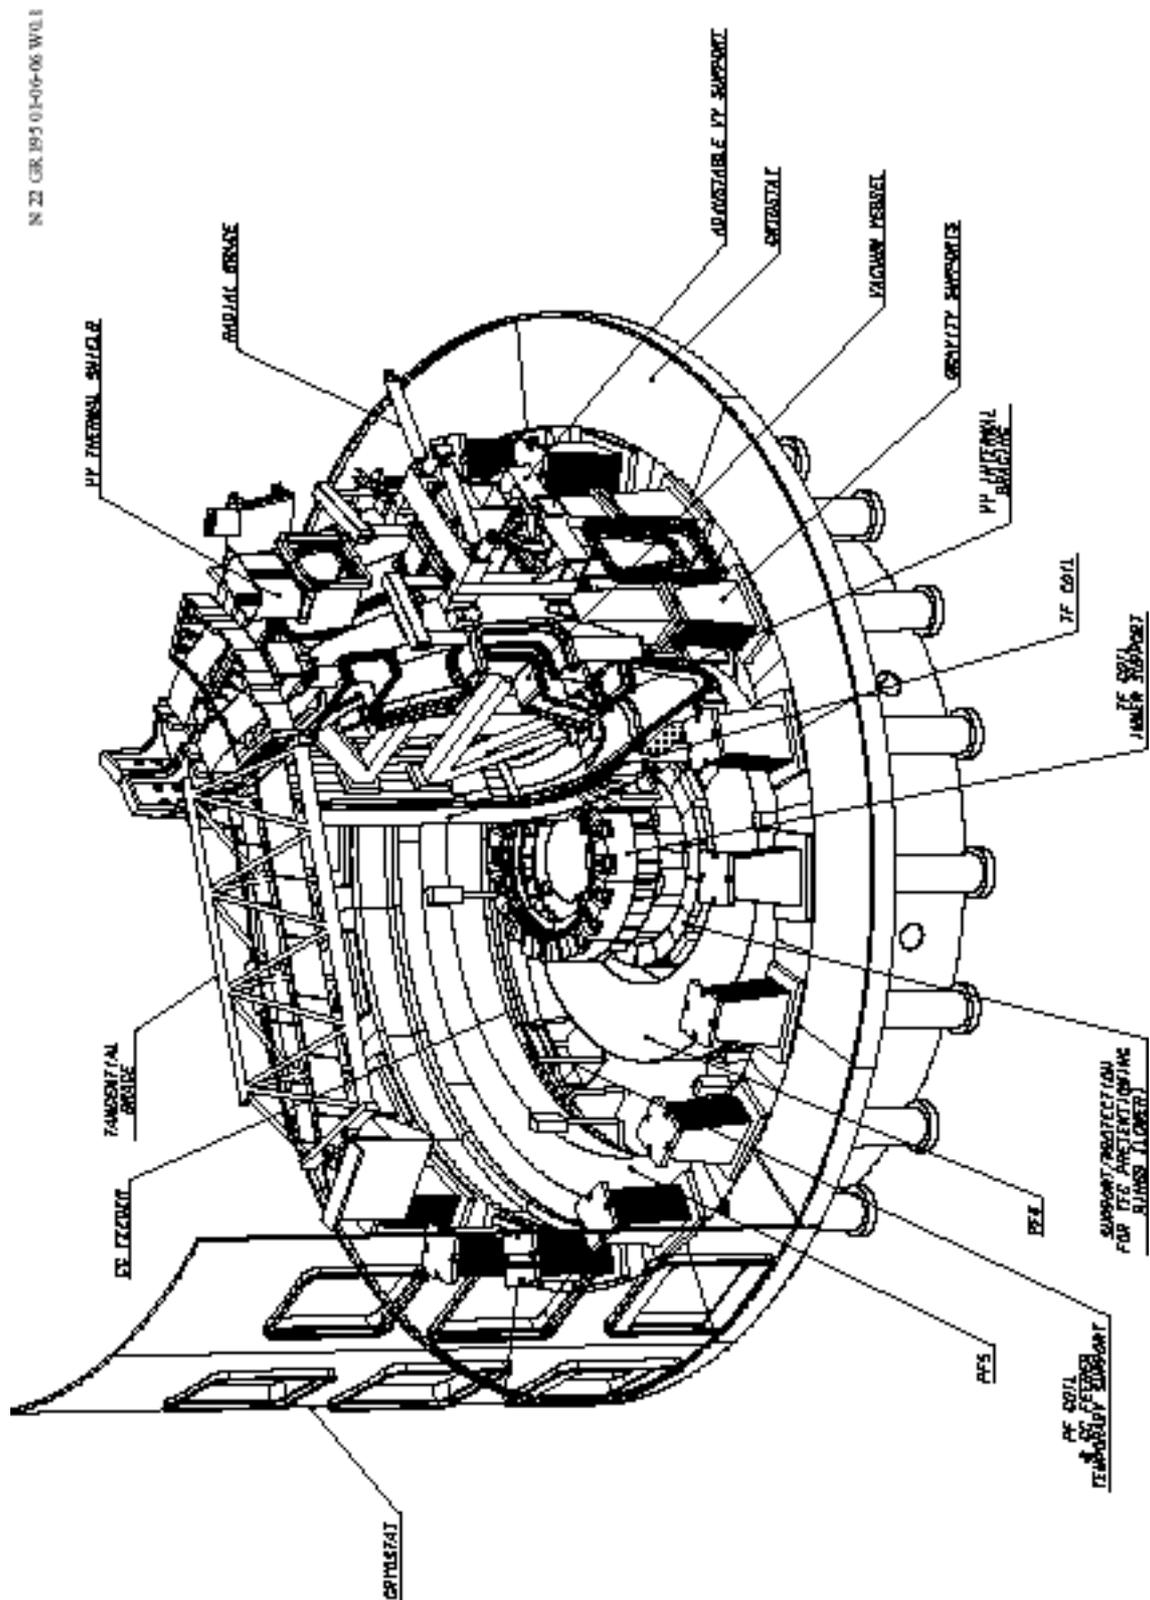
Layout of Assembly Support and Bracing Tools (2.2.B.04)
